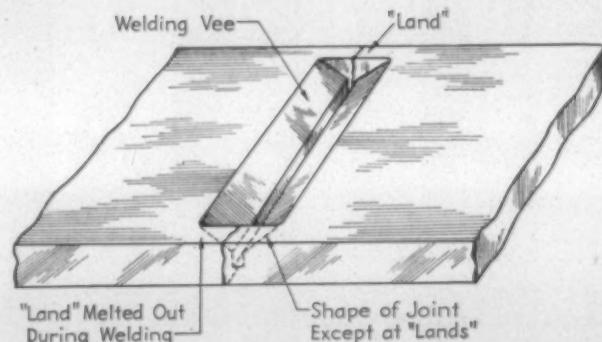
This sketch shows how joints may be prepared for welding with "lands" left at each side to aid in alignment.
